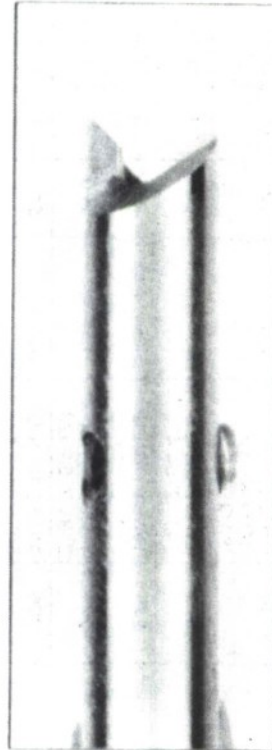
Alternate Drills for Supplemental Drilling Tests
